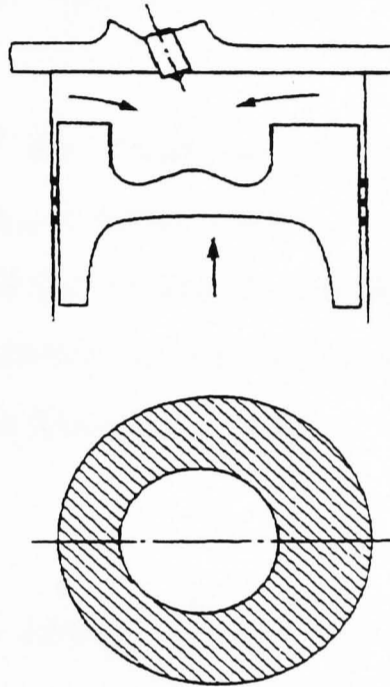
Bowl-in-piston DI diesel combustion chamber, showing squish flow above the piston face. The relative squish area is indicated by the shaded area in the plan view of the piston face and bowl-in-piston [Heywood, 1988].
